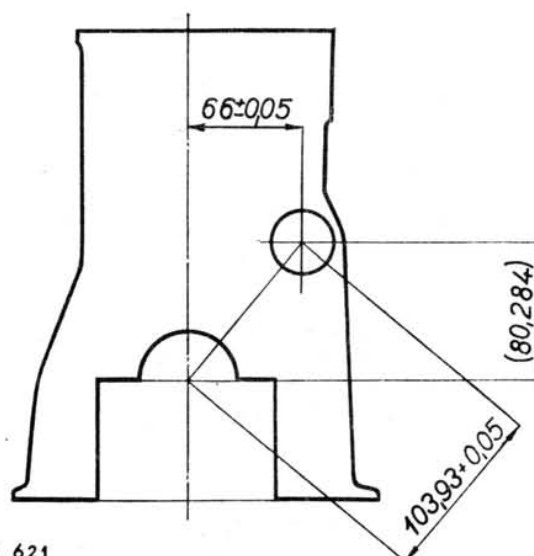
/3 - Centre Distances of Crankshaft and Camshaft
